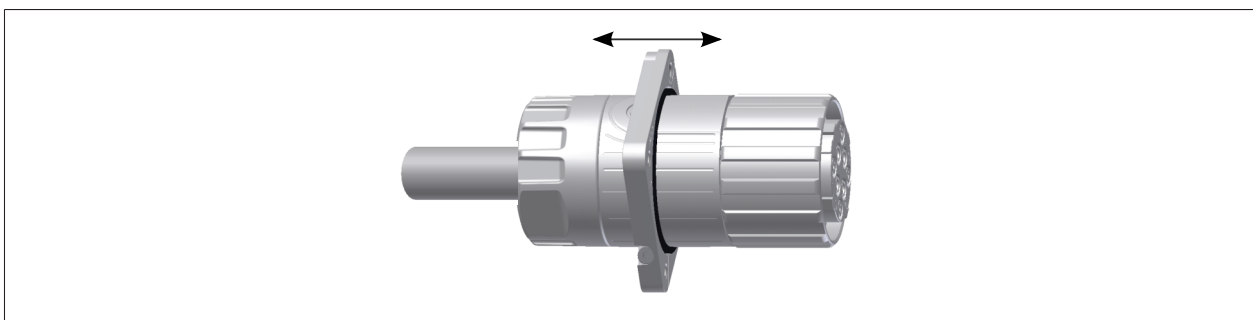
Attaching the metal flange to the connector (rear panel installation)
